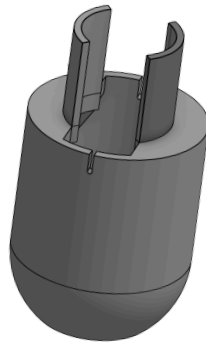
CAD design of custom endcap design, with dimensions of the bottom endcap section being 70 x 90mm, and the top section which will clip onto the walker leg being 25.4 x 30mm.
